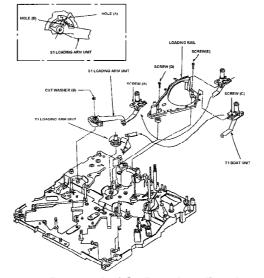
Removal of S1 Post Loading Arm Unit
